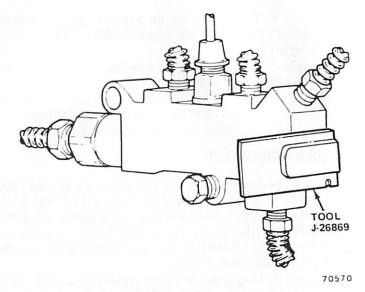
G-17 Metering Valve Tool Installation— Type-W Combination Valve
